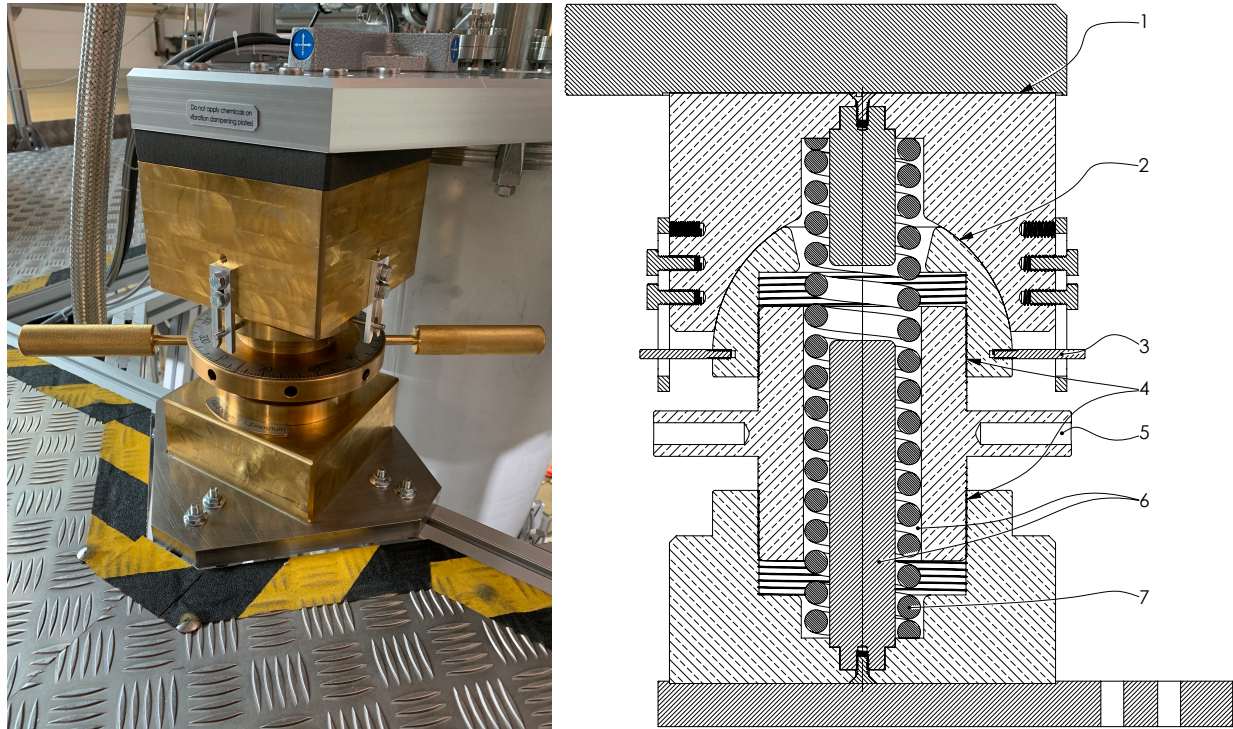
Levelling leg. Left: Photograph. Right: Cross-sectional view. Legend: 1 – Lateral bearing, 2 – Ball joint, 3 – Rotation and lifting lockout, 4 – Counter-rotating fine thread, 5 – Mechanical coupling for rotary motion, 6 – Inner rods and central tube, 7 – Compression spring. The drawing shows a modified version of the actual assembly from the utility model registration. For Xenoscope the lateral bearing was realised in between the bottom plate and the leg, and the lifting logout is realised by a steel chain.
